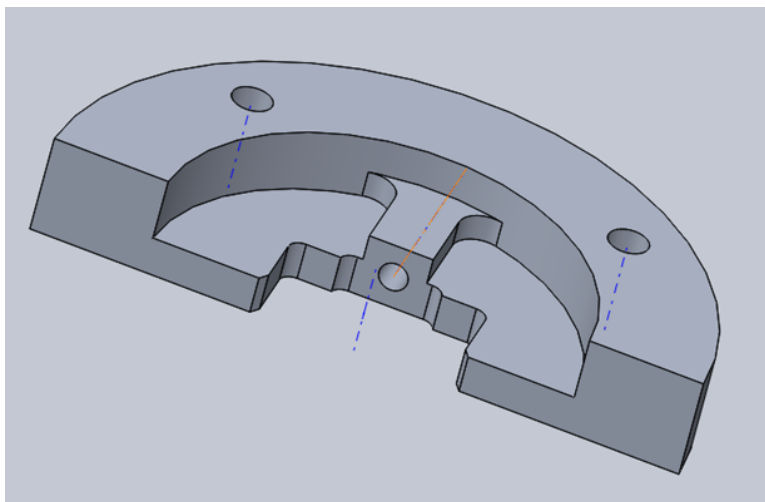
Modified half of piston guide to allow for attachment of ball plunger.
